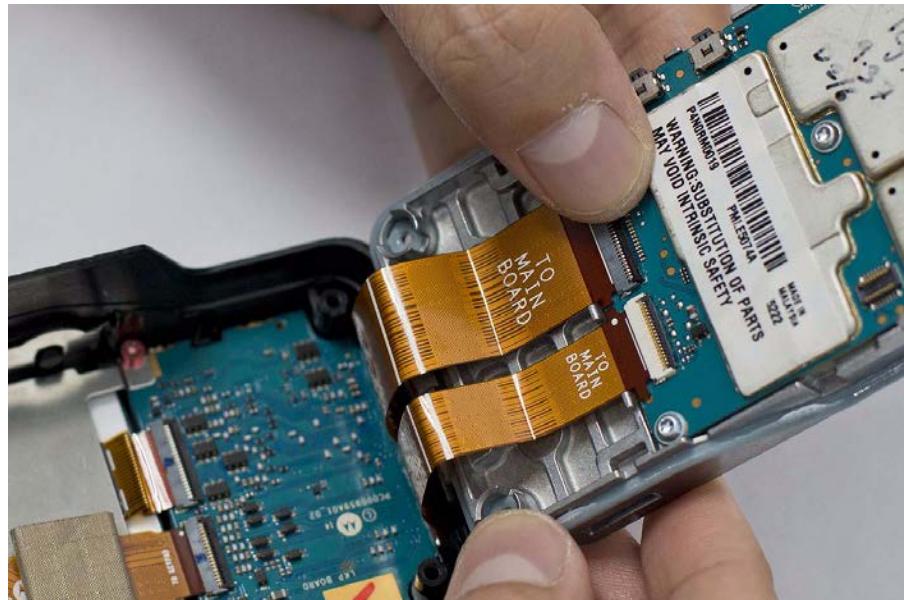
Interface flexes reassembly (Limited Keypad Model)
